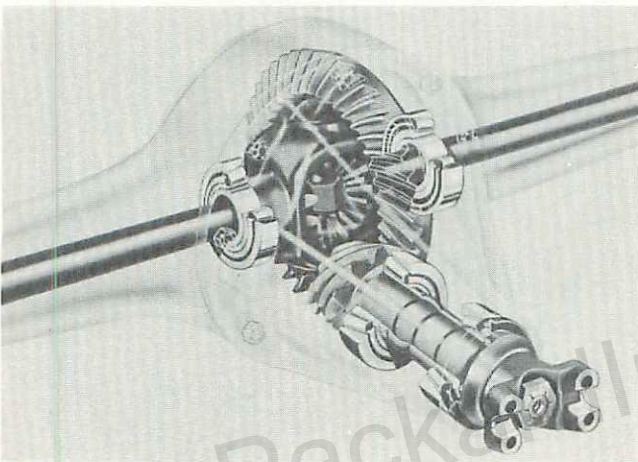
The Pinion Shaft and Differential Case are Carried on Tapered Roller Bearings
